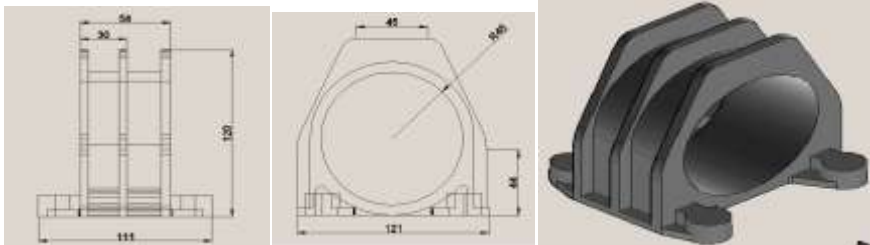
gauge frame 2-D view Fig 1.2 gauge frame 3-D View
